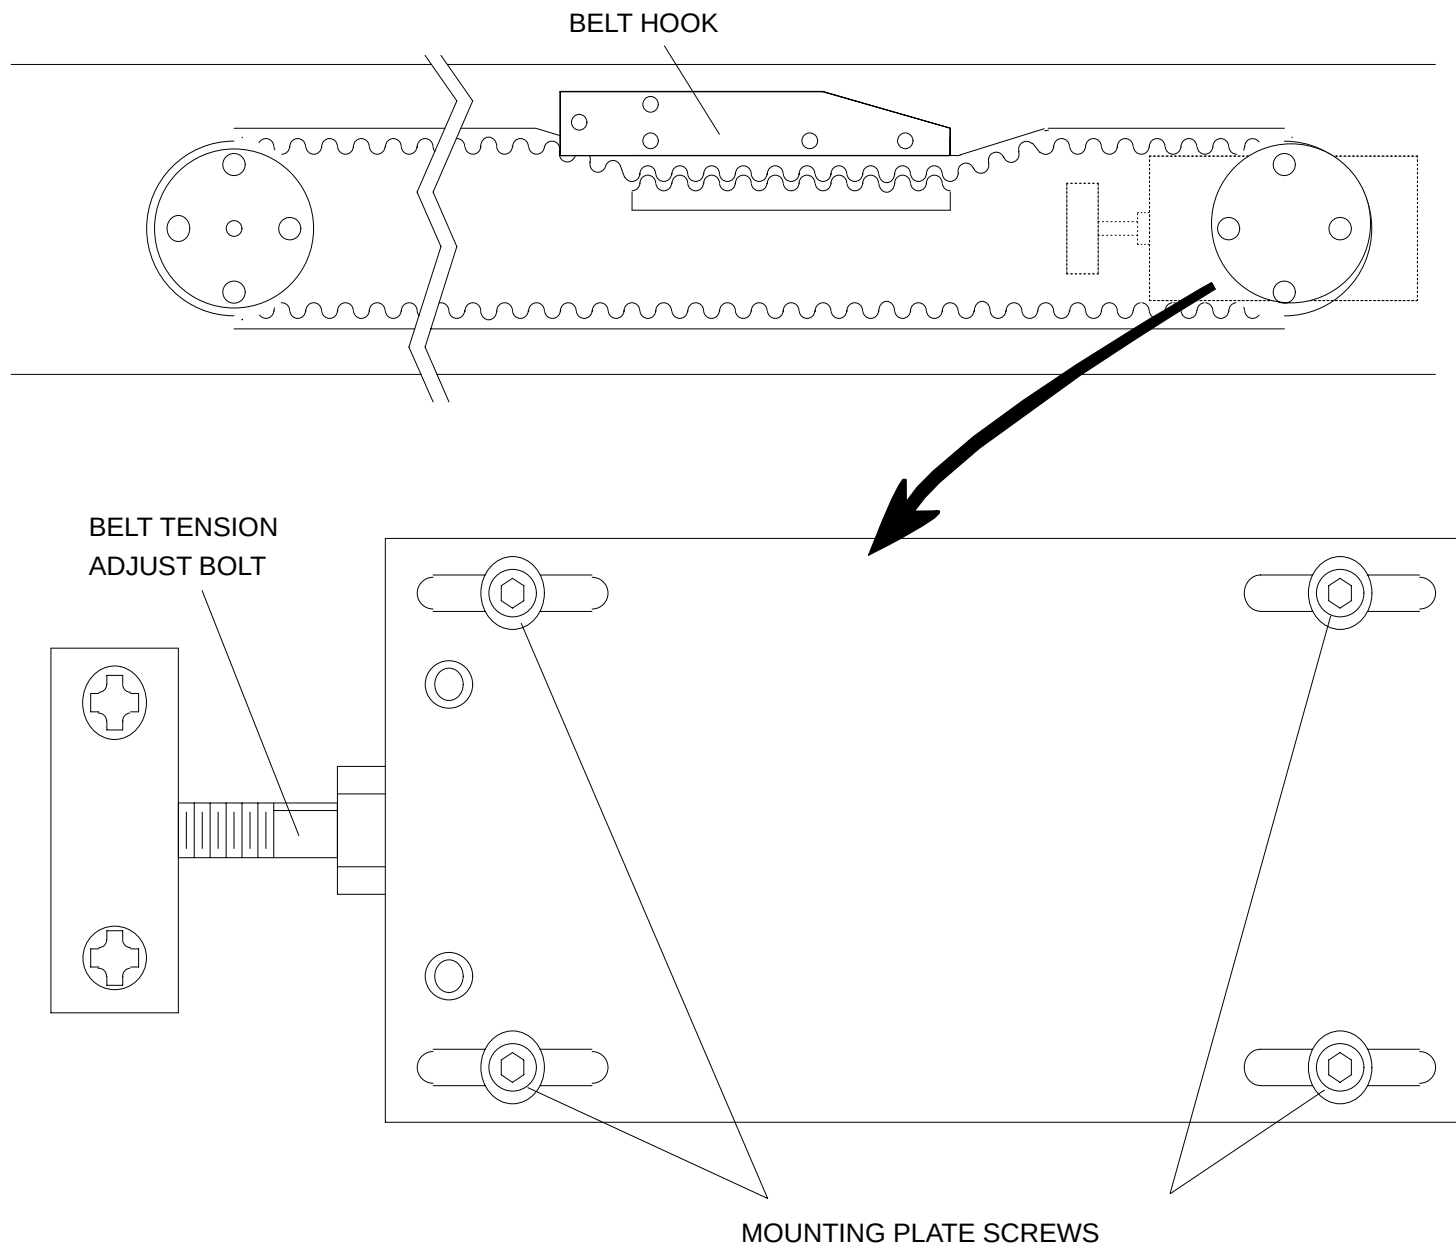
HORIZONTAL DRIVE BELT TENSION ADJUSTMENT
